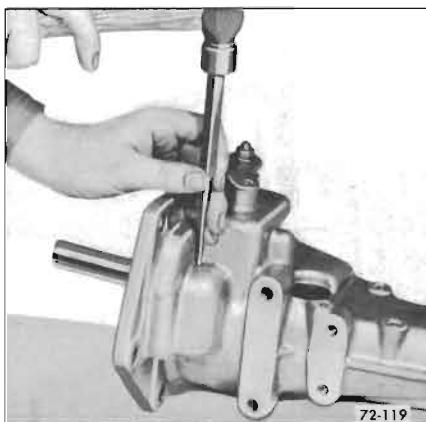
Removing Reverse Idler Shaft Lock Pin
